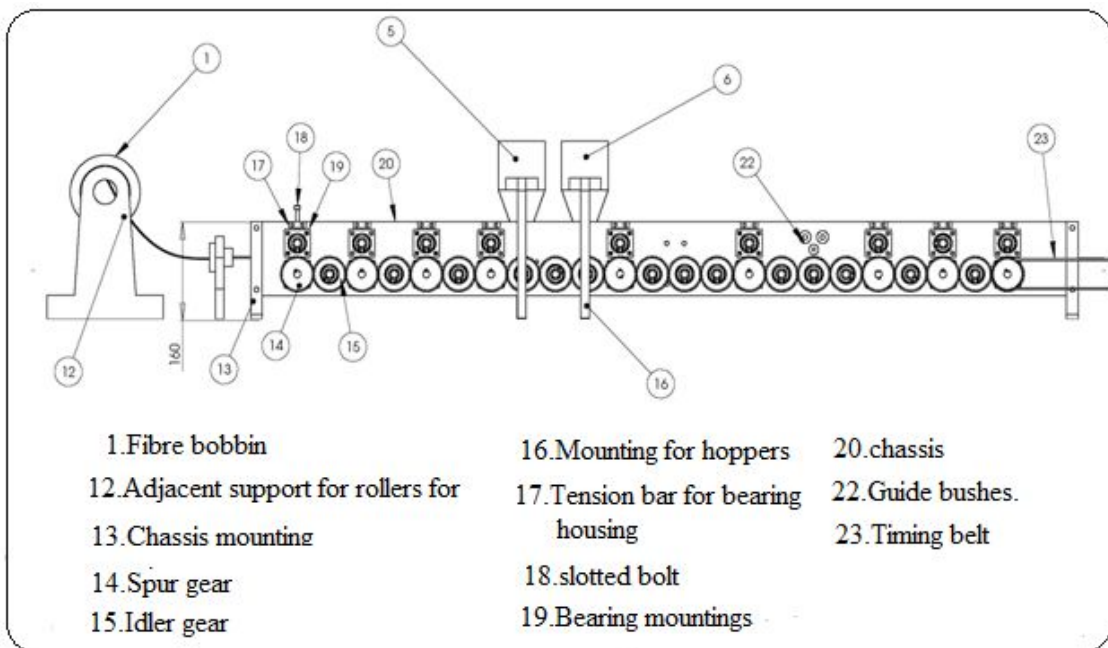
(a) Side view describing the first stage of operation of the machine
